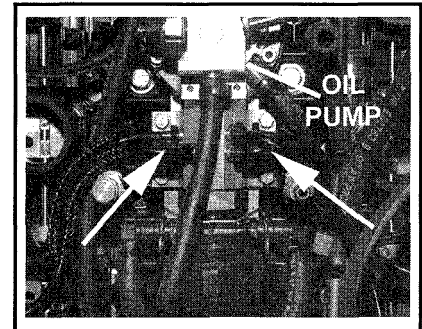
Tag and disconnect the hoses and wiring from the assembly...
